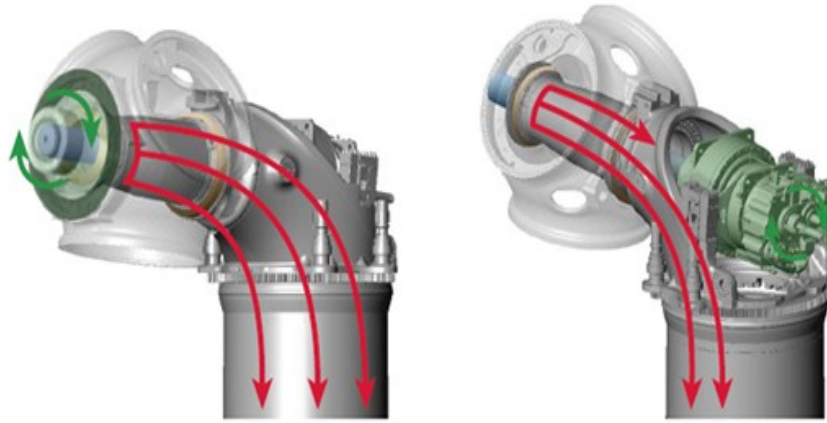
Alstom Pure Torque® System directs bending loads to the tower structure [59]
